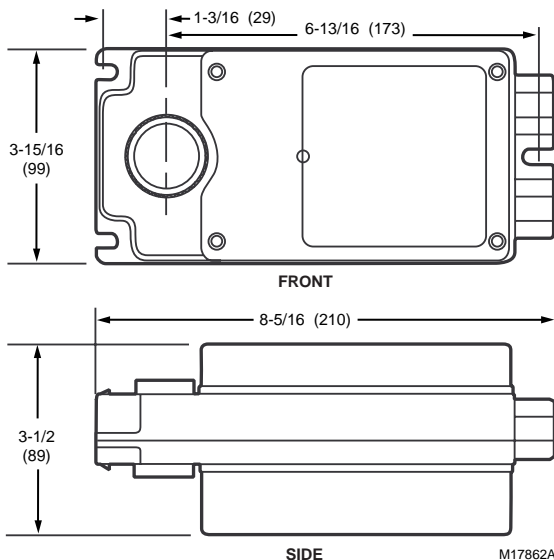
Approximate actuator and mounting bracket dimensions in in. (mm).
